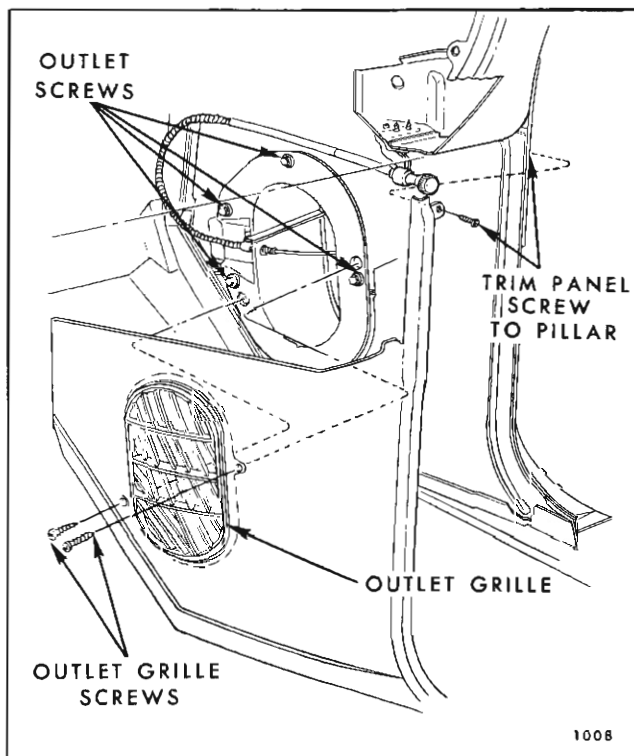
C13—Attachment of Air Outlet, Outlet Grille and Trim Panel
